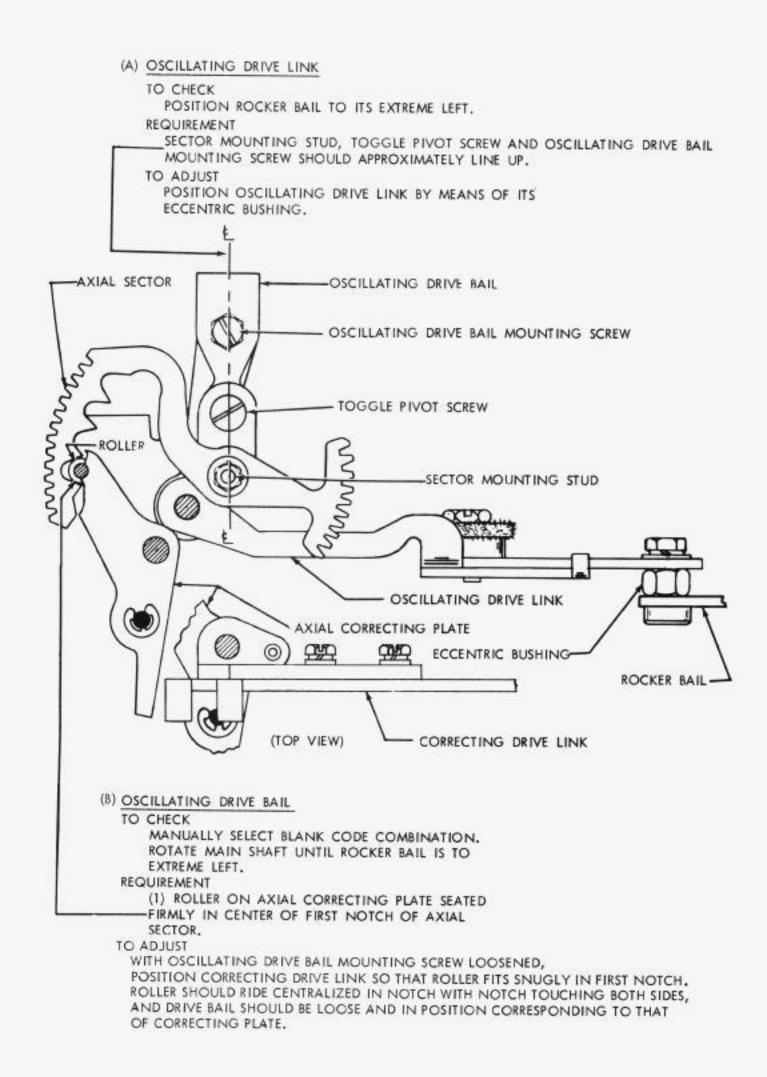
AXIAL POSITIONING MECHANISM
